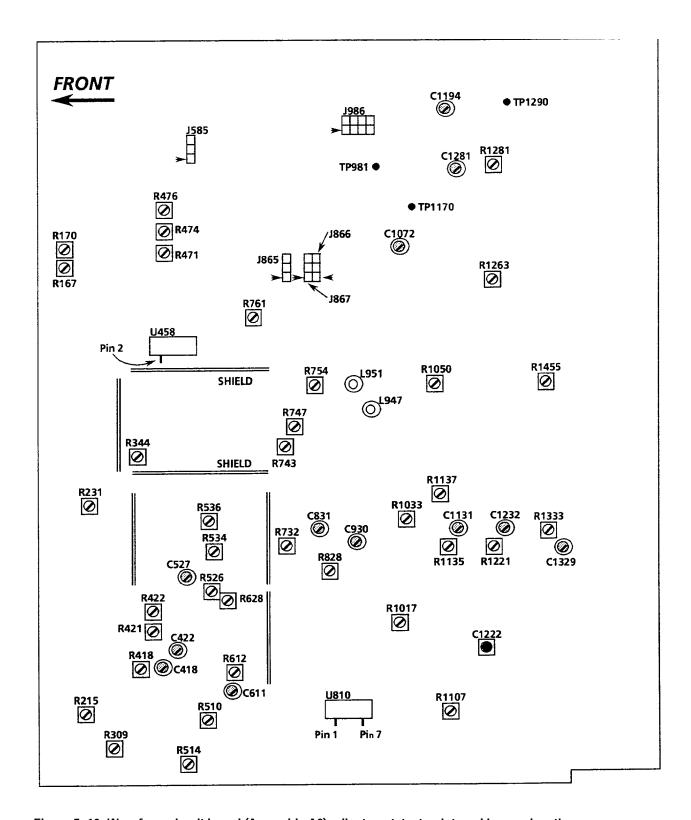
Waveform circuit board (Assembly A2) adjustment, test point, and jumper locations.
